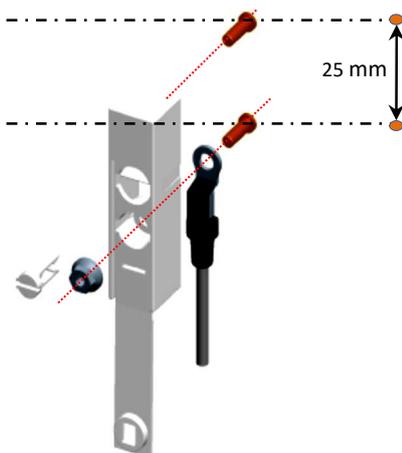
B: Welding stud spacing for remote sensor mounting
